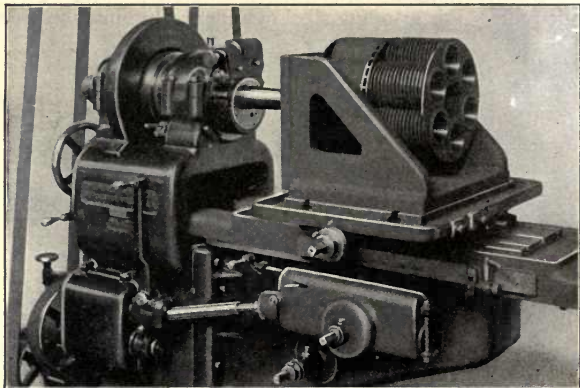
Grinding a special internal combustion engine cylinder on a Heald cylinder grinding machine.
